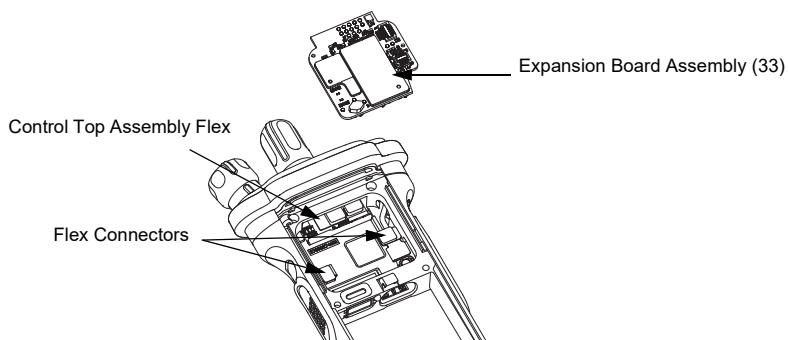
Remove Flex Connectors and Expansion Board Assembly
